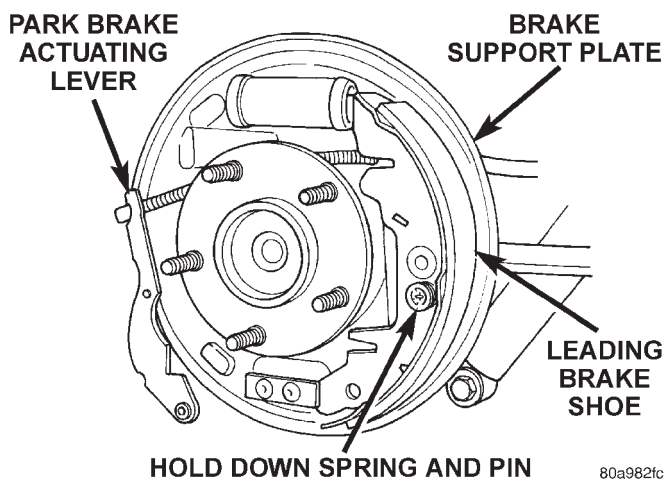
Leading Brake Shoe Hold Down Spring And Pin
